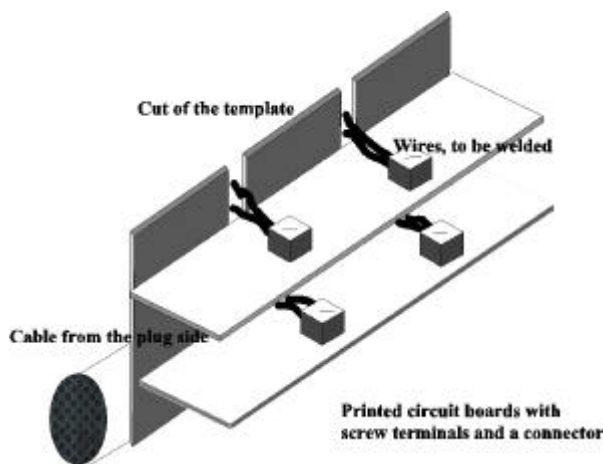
Sketch of the wiring template, looking sideways, along the cables, and under an oblique angle. Note the notches in the base templates and the additional printed circuit boards, to be removed after the test.
